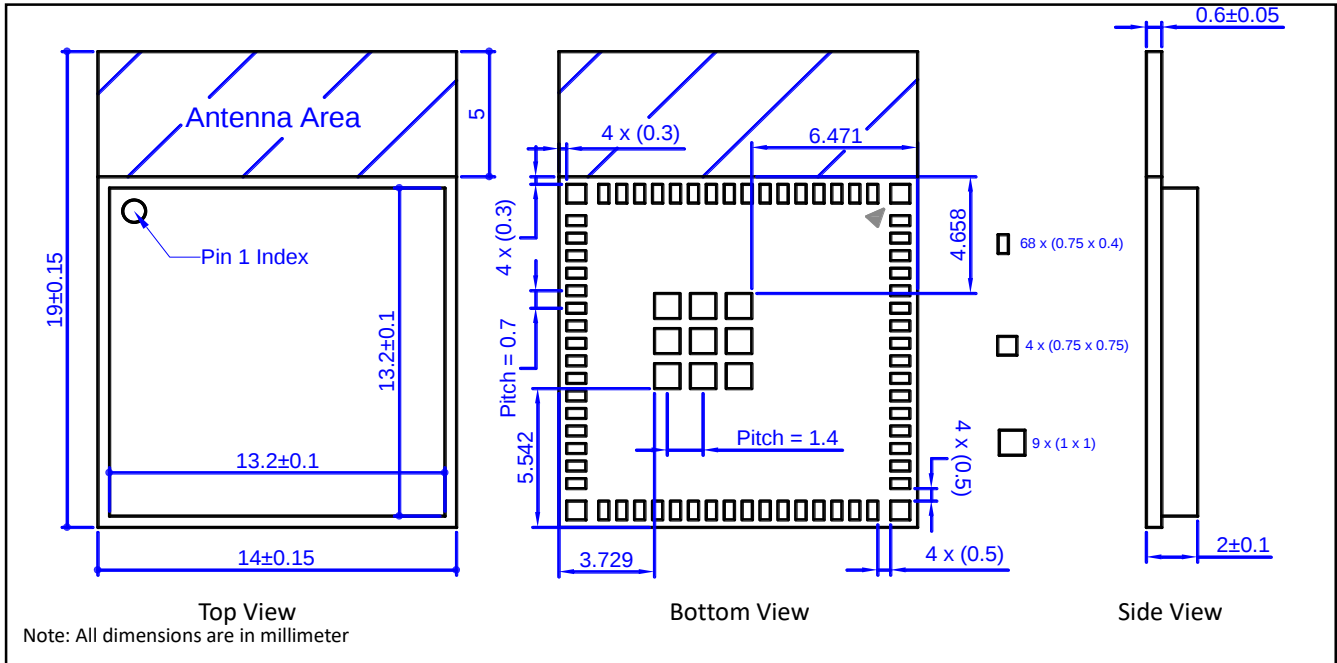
Mechanical Drawing of BDE-BW3501A and BDE-BW3501U
